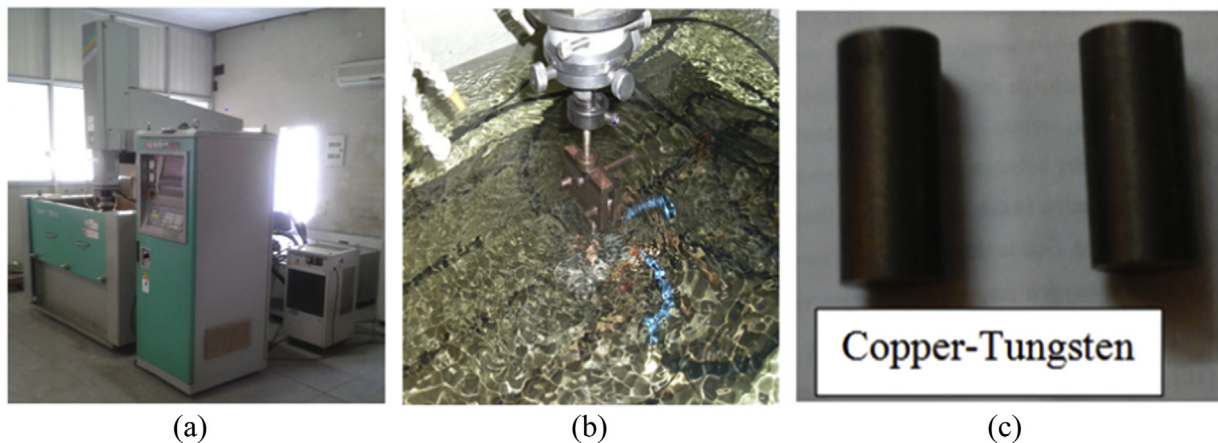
(a) Pictorial view of CNC EDM machine, (b) Actual machining operation, and (c) Pictorial view of copper-tungsten electrode.
